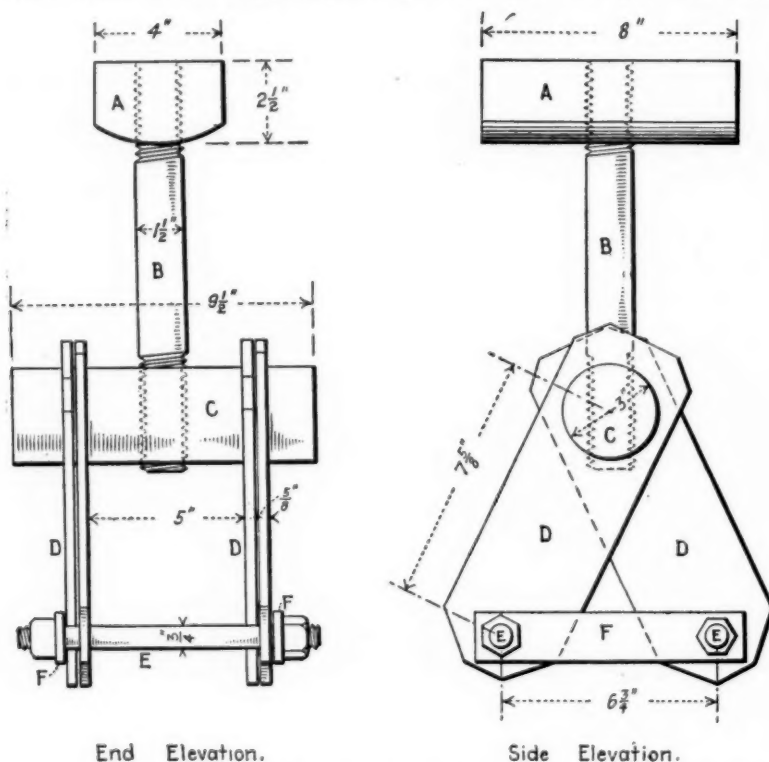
Apparatus for Holding Tension Test Specimen. This Apparatus is Inverted to Hold Bottom Half of Specimen.
